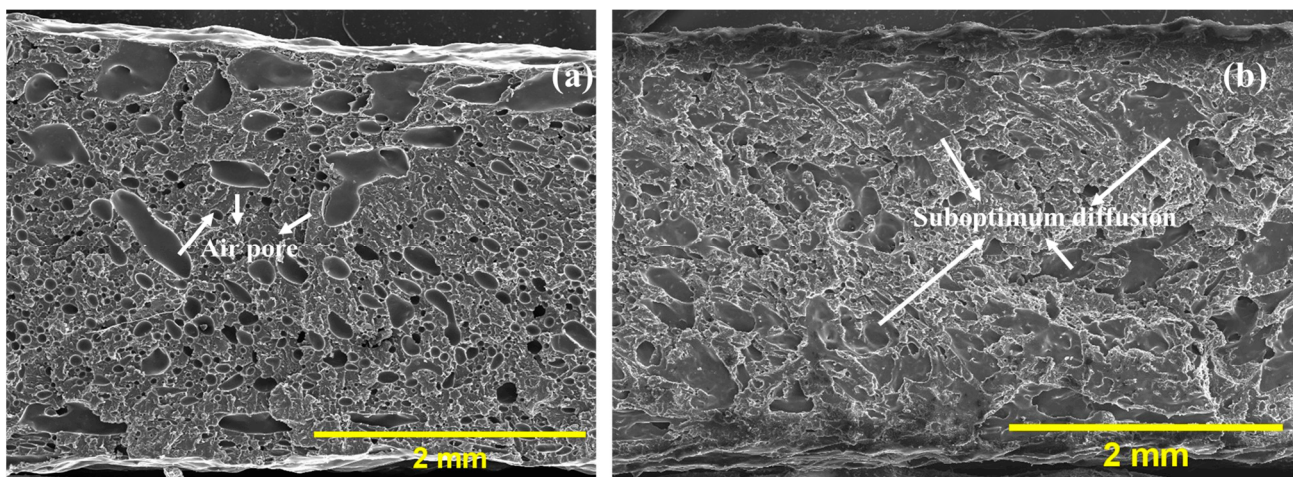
Tensile fracture morphology of PEI-CF (a) 2B and (b) 4B designs.
